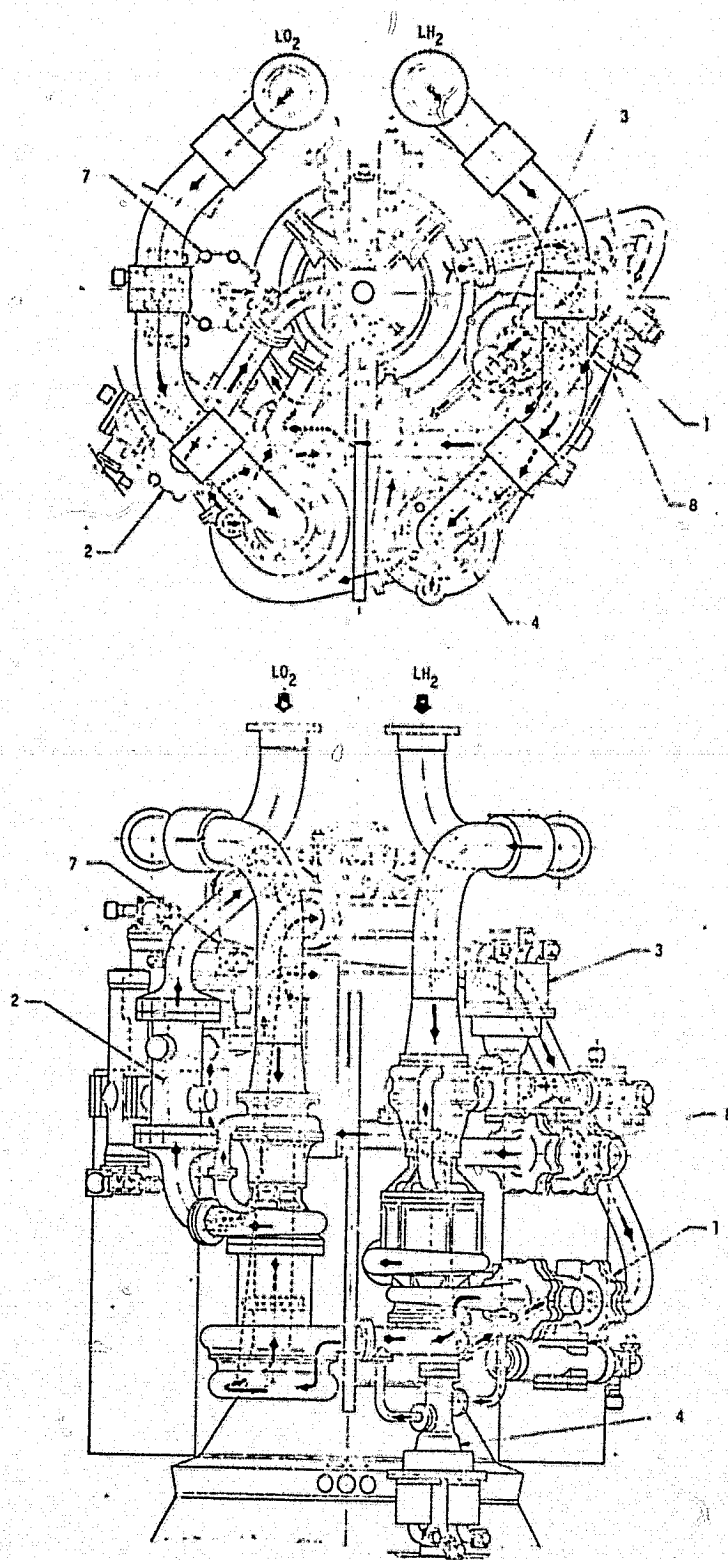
Engine Layout (ALRC Drawing No. 1193100) Sheet 2 of 3
